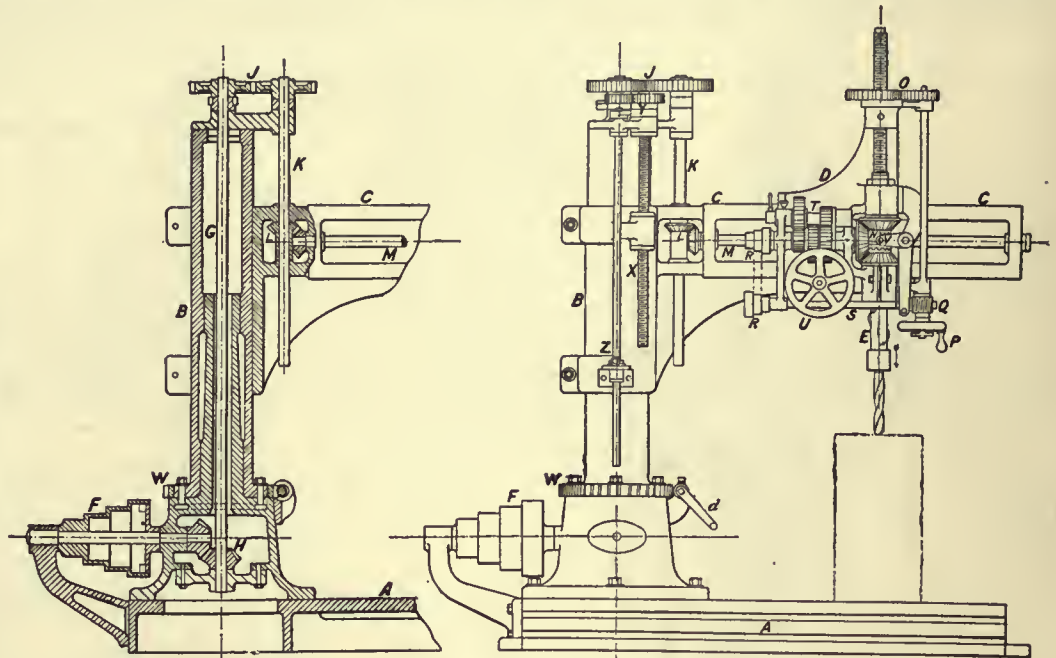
Pillar Radial Drilling Machine, 5 ft. radius.
